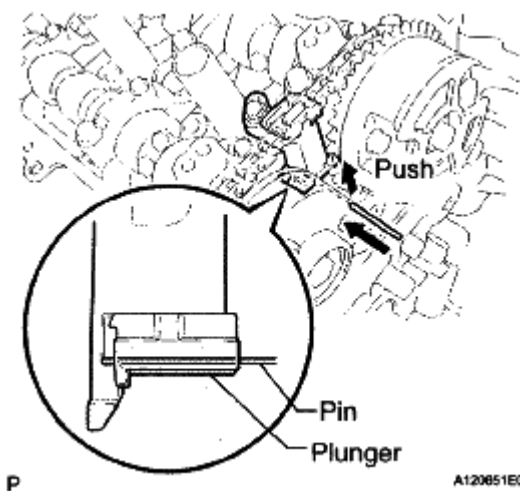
Inserting Pin Into Hole To Fix No. 2 Chain Tensioner
